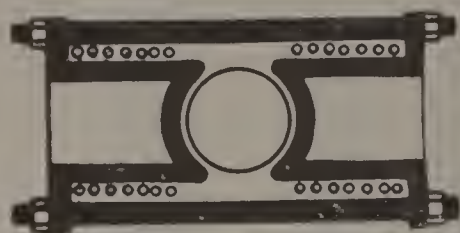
EARLY FORM OF FIELD MAGNETS USED IN THOMSON-HOUSTON MACHINES.
